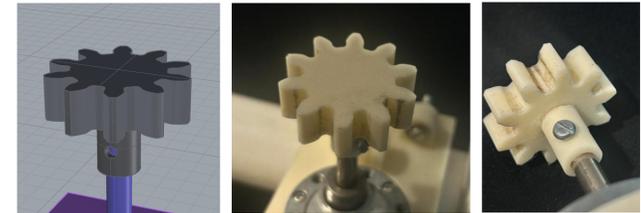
Images and Drawings of the gear system. The small gear was attached to the motor using a screw.
